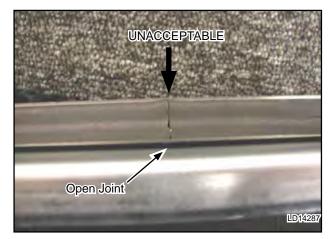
EXAMPLE OF AN UNACCEPTABLE JOINT - LESS OBVIOUS OPEN JOINT
